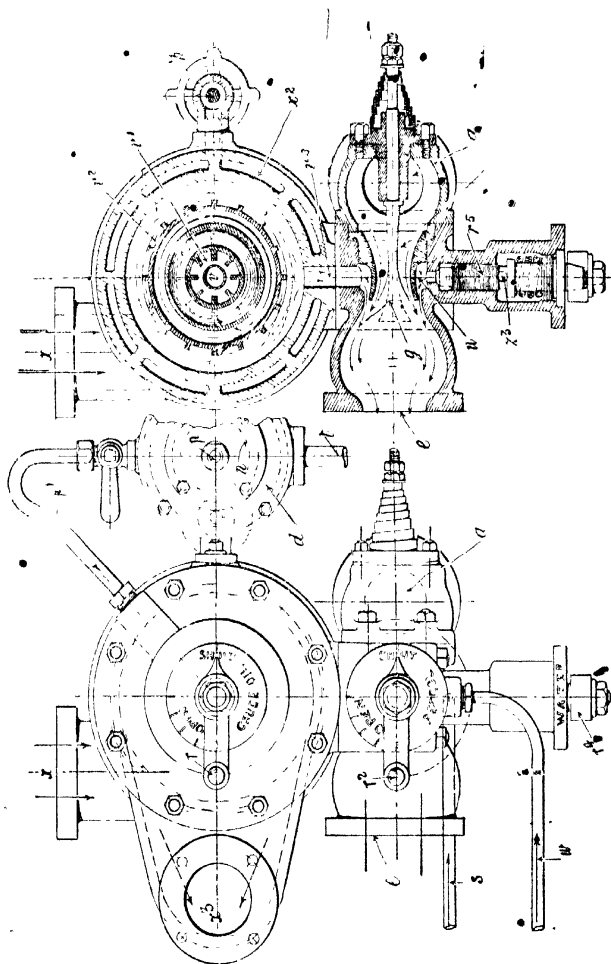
Plan views of Butler vaporiser for four-cylinder gas engine.
